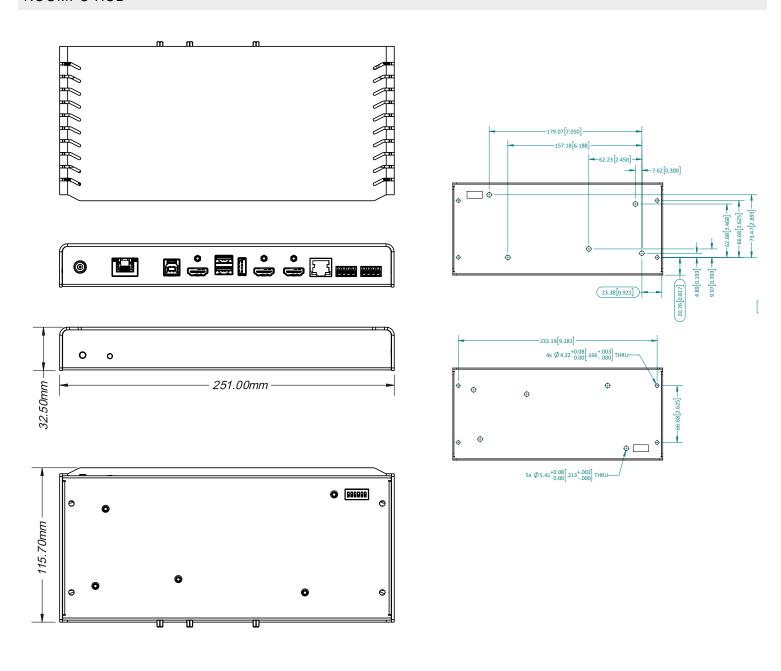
Bottom plate dimensions and holes positions of laptop hub
